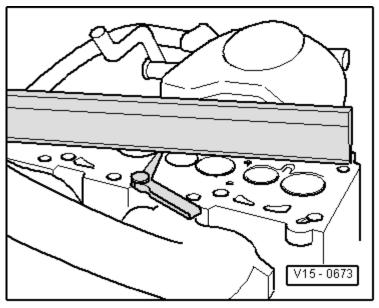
Identifying Check Of Cylinder Head For Distortion
